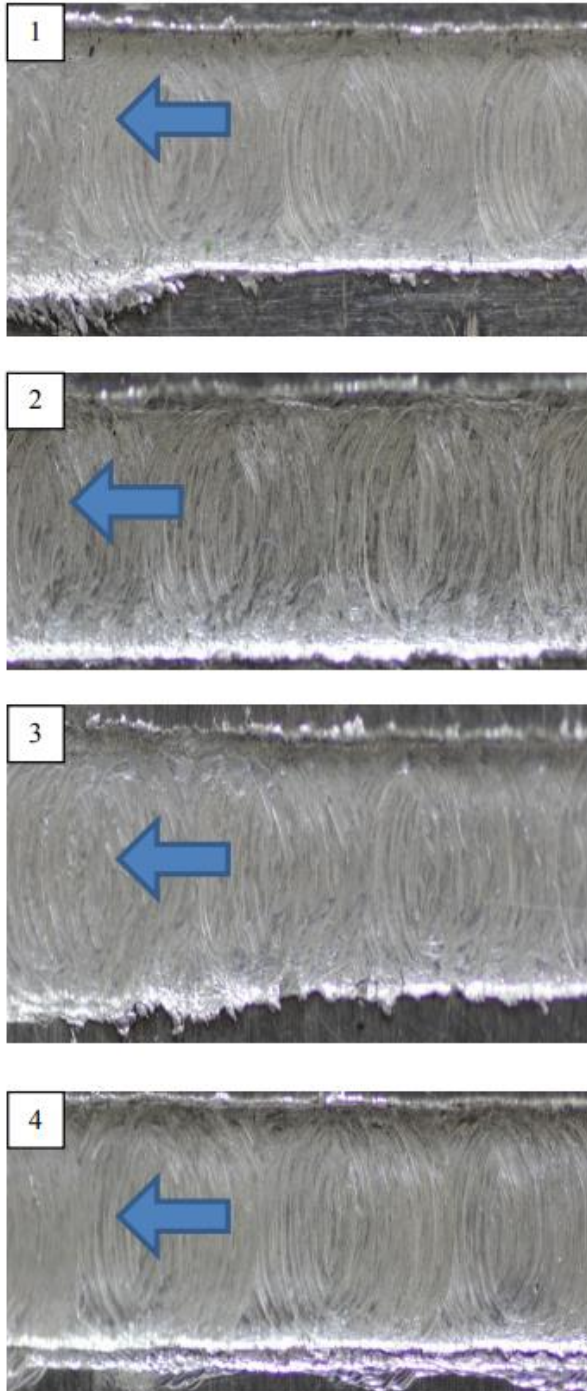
Macroscopic photo of 5052 aluminium surface machined by DIY Milling Machine (1) feed rate 24 depth of cut 0.25, (2) feed rate 24 depth of cut 0.75, (3) feed rate 42 depth of cut 0.25, (4) feed rate 42 depth of cut 0.75
